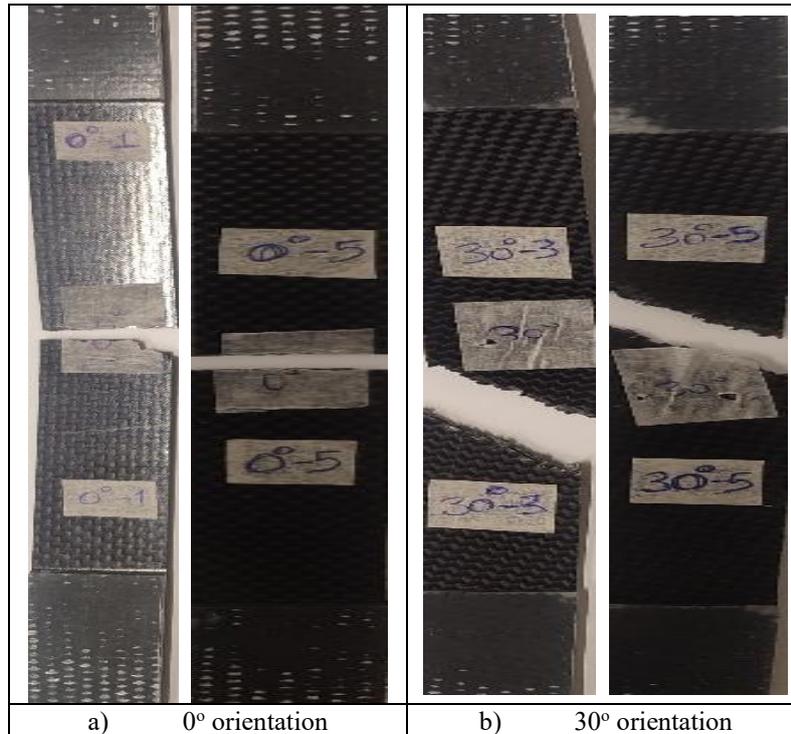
Fracture surfaces of two oriented samples after tensile testing
